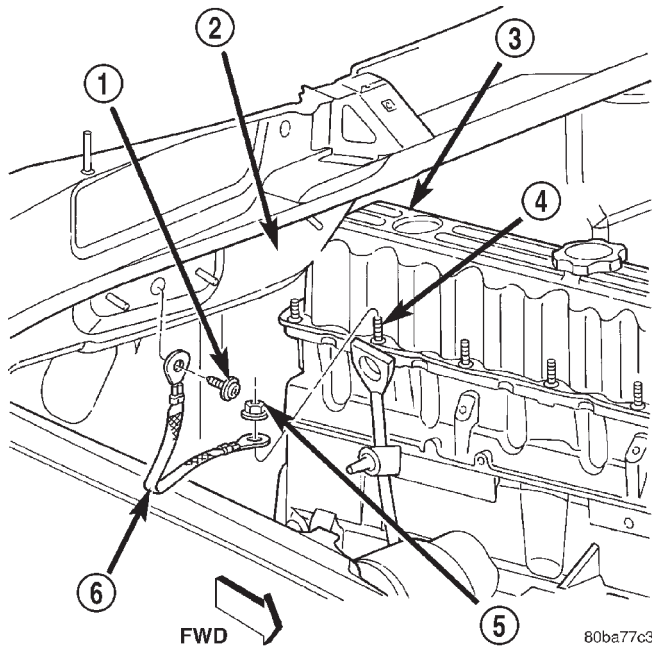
Engine-To-Body Ground Strap Remove/Install - 4.0L Engine
